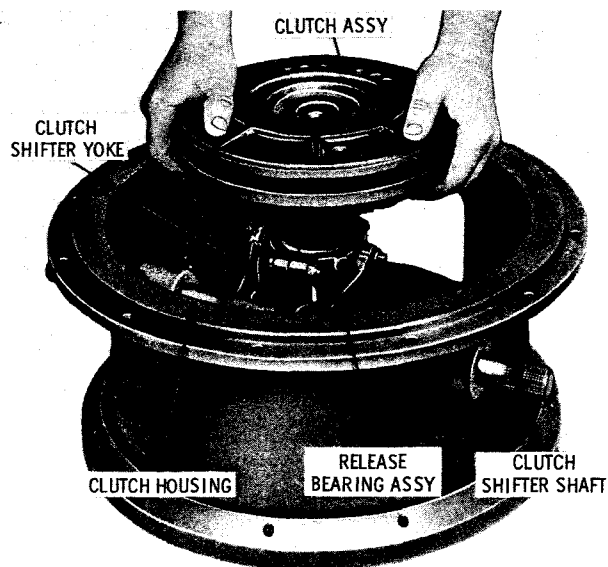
Removing (or installing) input disconnect clutch assembly
